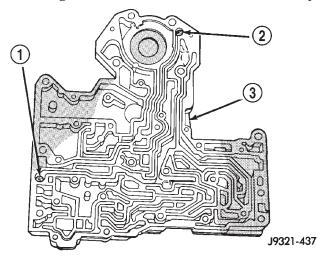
Rear Clutch And Rear Servo Check Ball Locations
